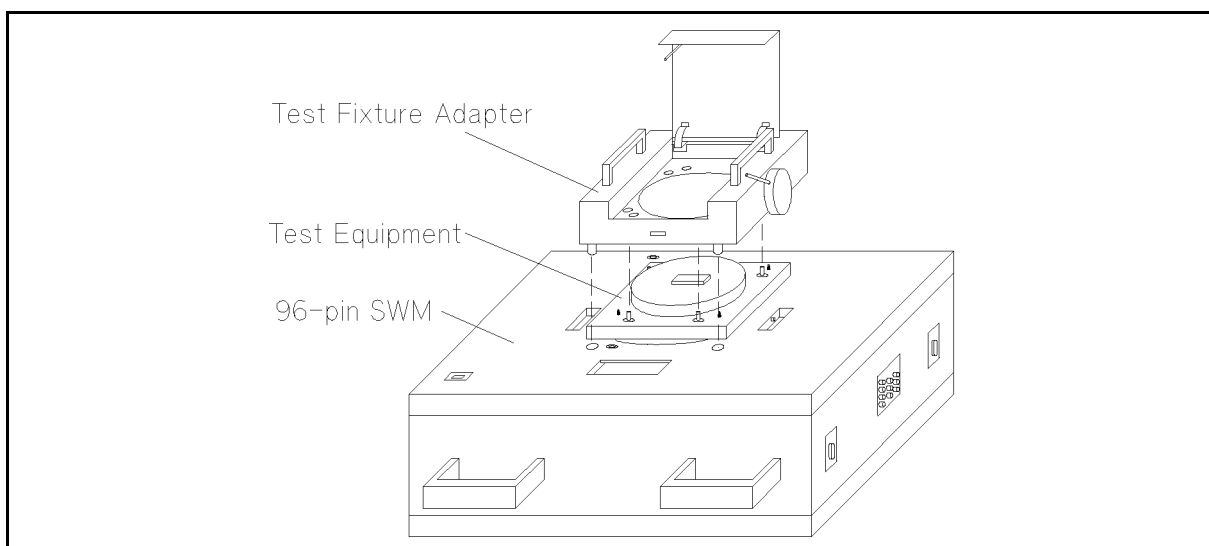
Mounting Test Equipment (96-pin SWMs)
